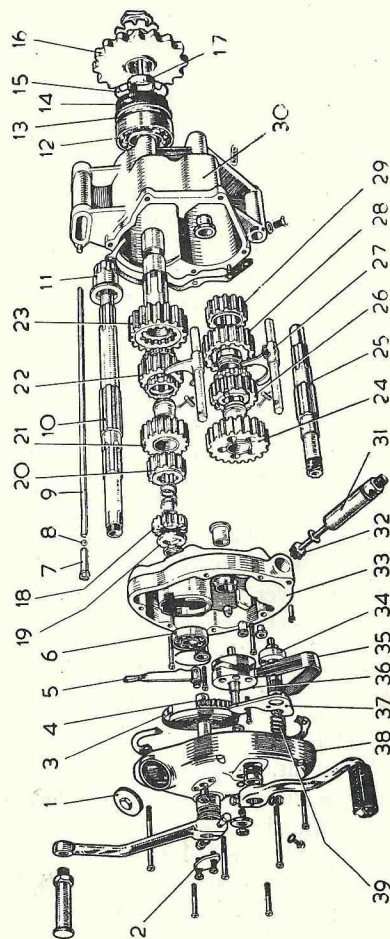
EXPLODED VIEW OF GB GEARBOX AND CLUTCH ASSEMBLY.
